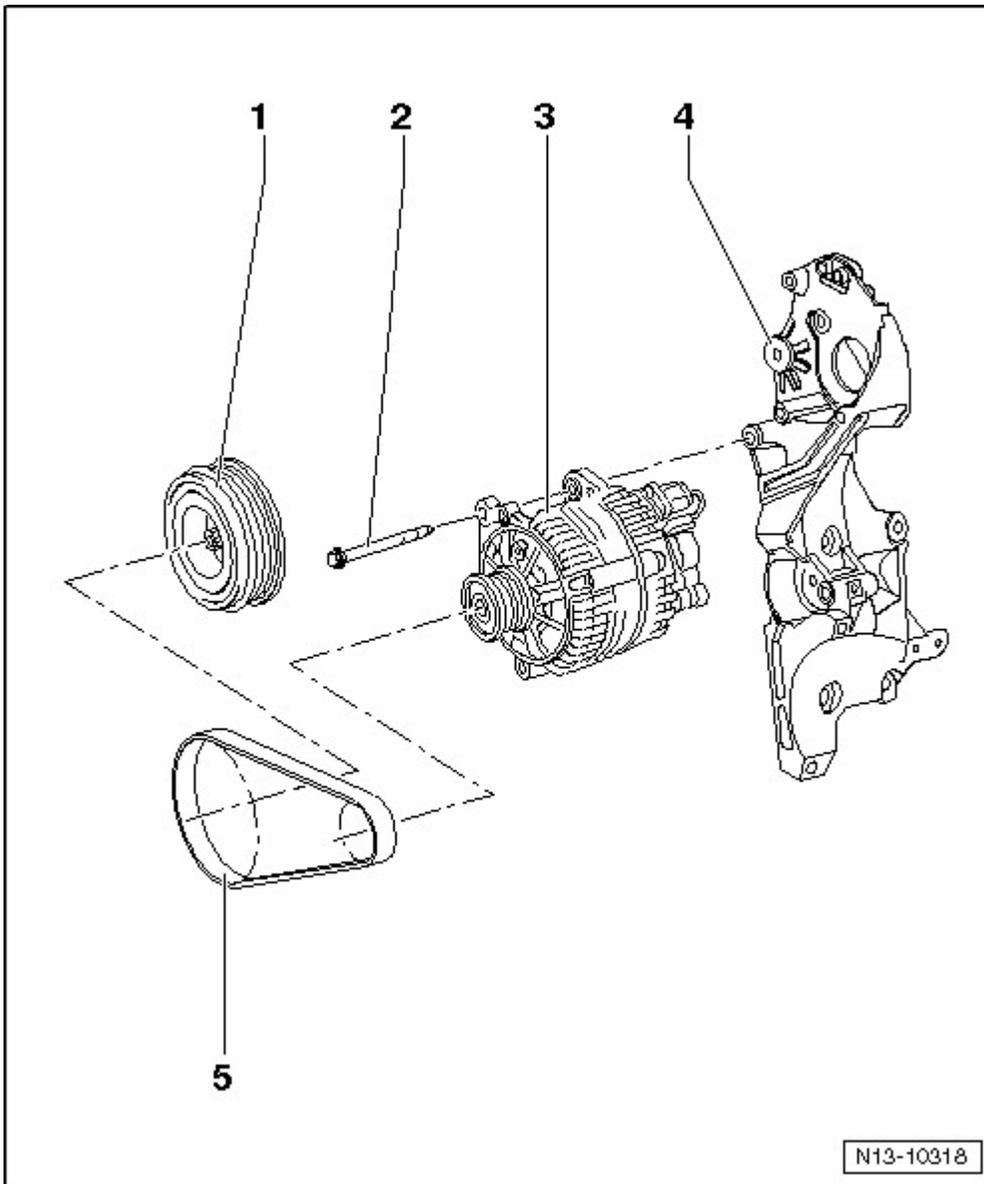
Ribbed Belt Drive Without A/C Compressor Assembly Overview
